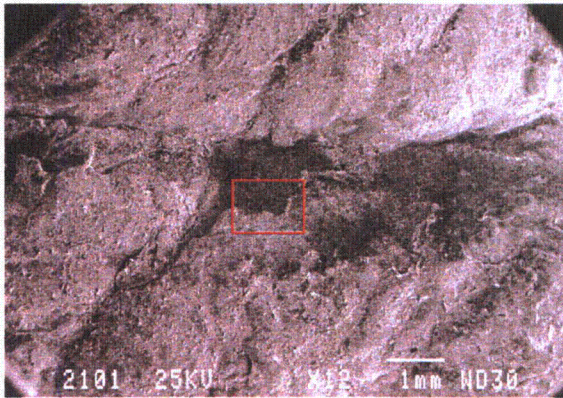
(2) Appearance of fracture surface of channel head body after removal of sample
